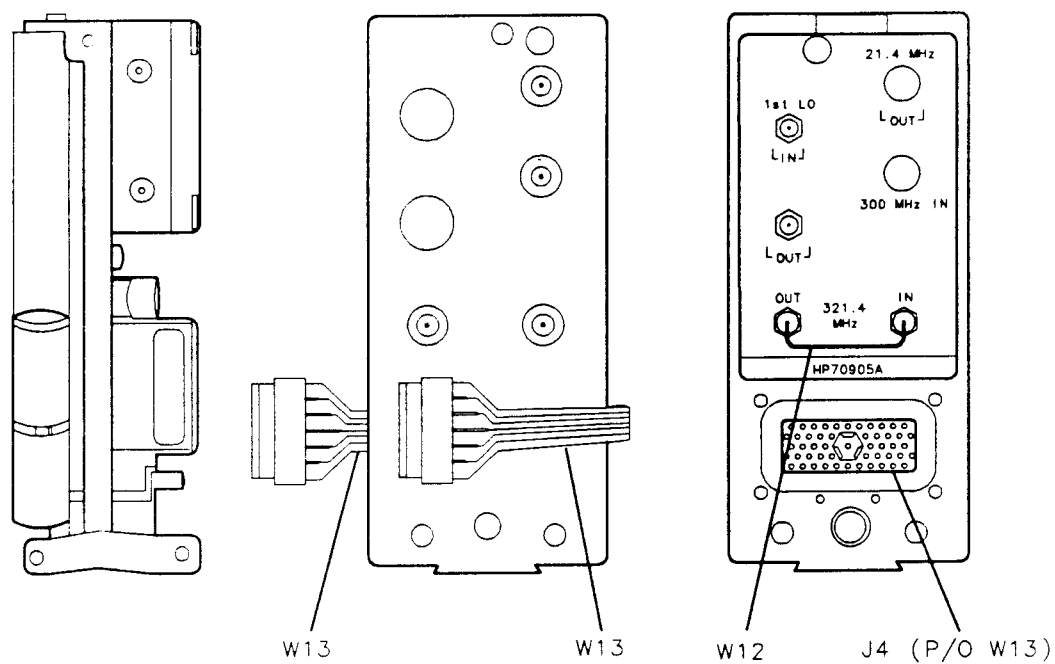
Right-Side View, Assembly and Cable Locations
